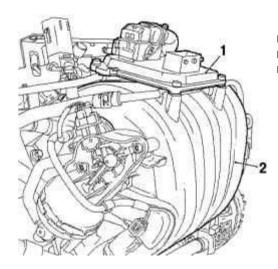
Mounting electronic module: 1 - an electronic control module engine Simtec 75.1; 2 - inlet manifold
